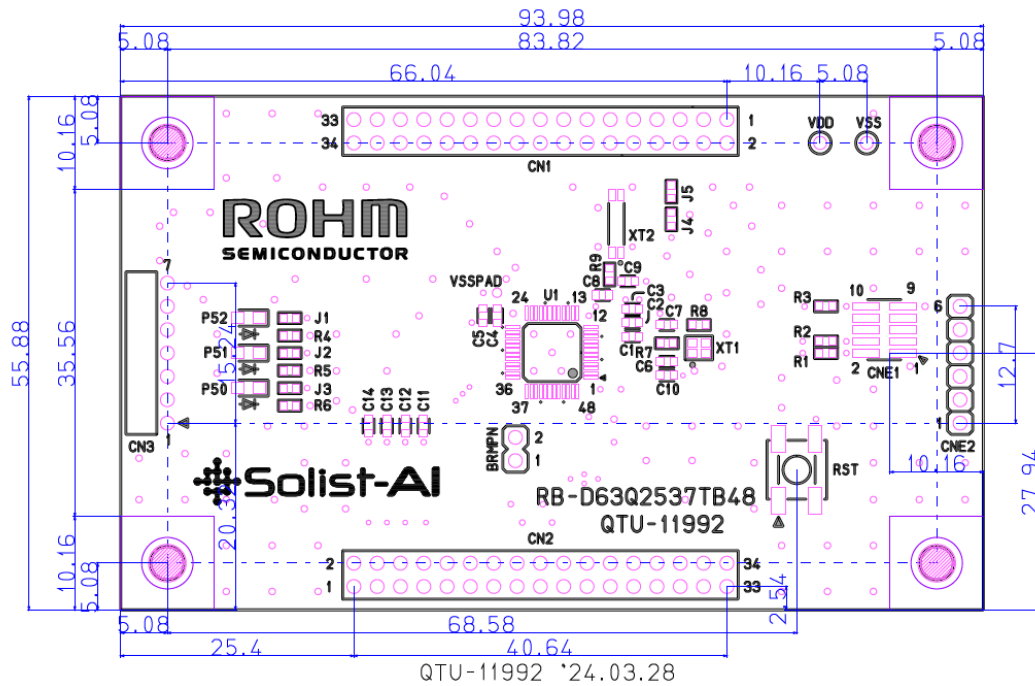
RB-D63Q2537TB48 Board Dimensions (Top View)
